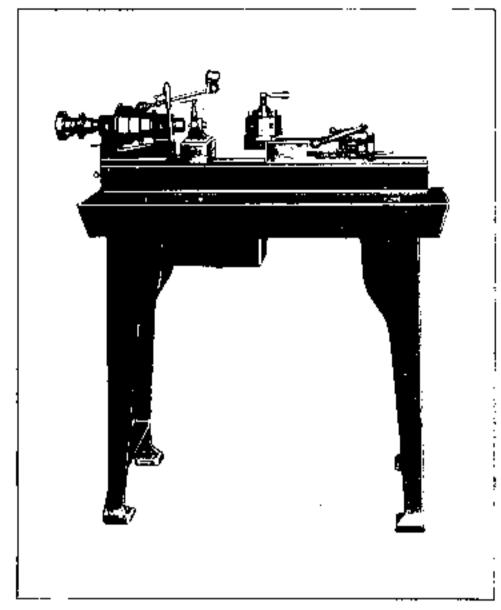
Lathe with Lever Chuck Closer, Cutting-off and Forming Slide, Turret Attachment-Automatic Indexing, Oil Pan, Floor Legs, Oil Pump and Piping
